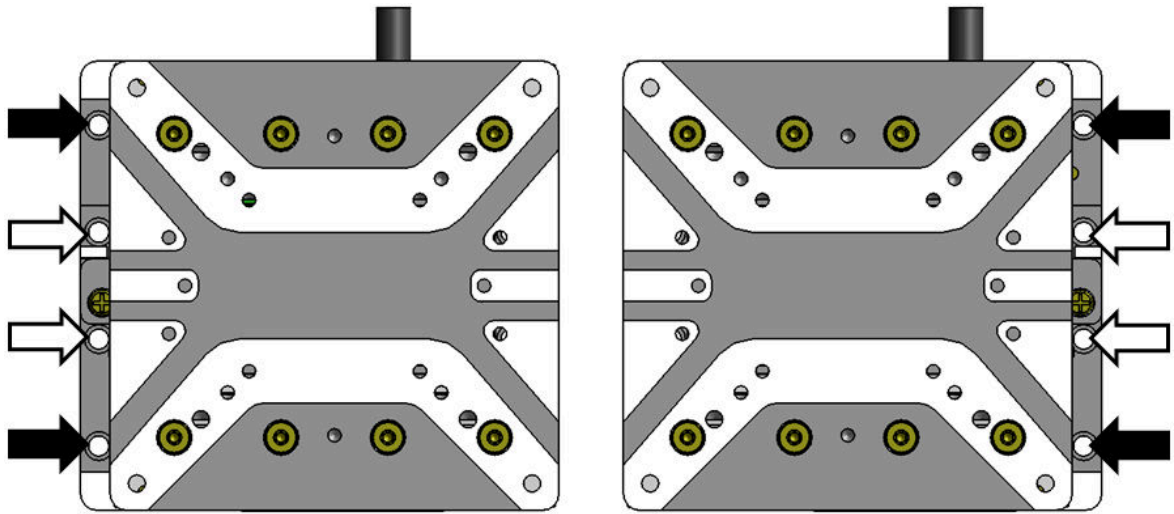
Mounting holes in the base body of the U-523.25 for M1.6 screws
